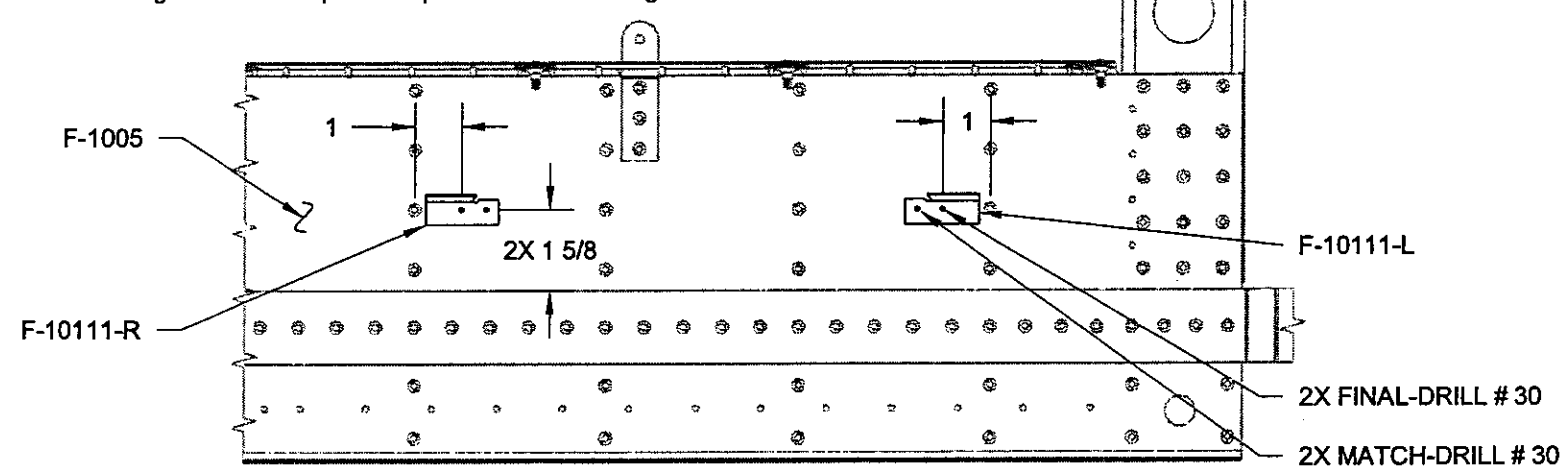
ATTACHING ANGLE BRACKETS TO THE REAR SPAR BULKHEAD ASSY (FRONT VIEW)
